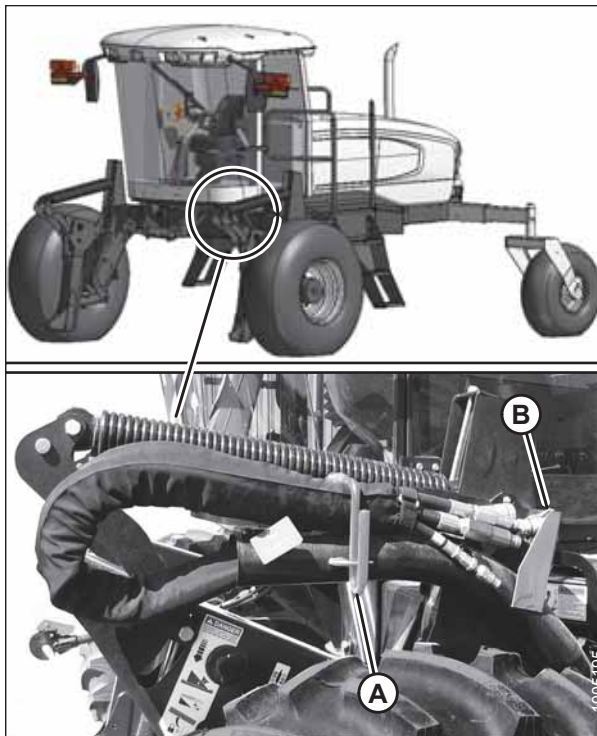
MD #B5455 Hydraulic Drive Kit
